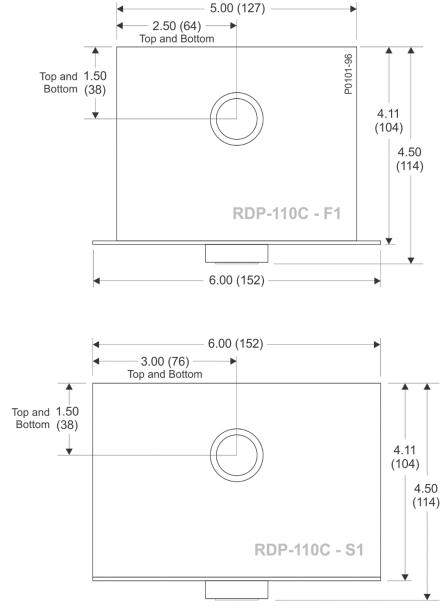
Mounting Dimensions and Knockout Locations, Top and Bottom, F1 and S1 Styles
